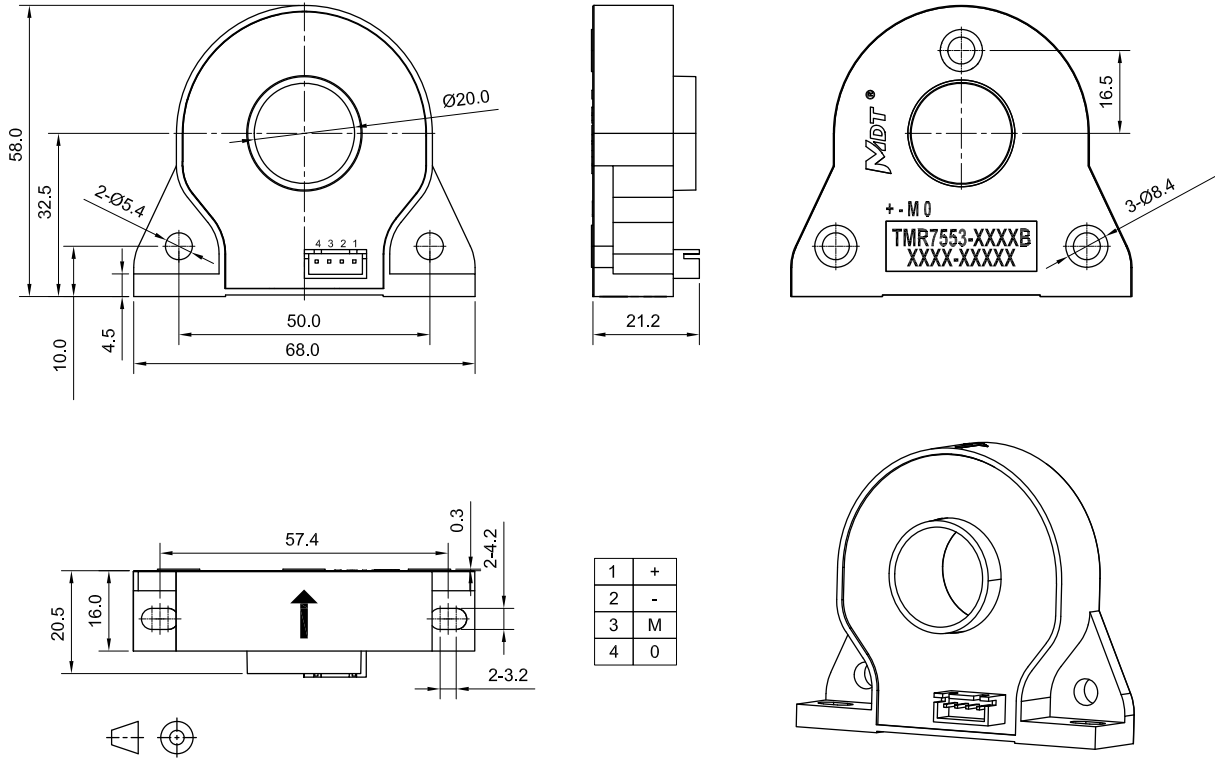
Dimension (unit: mm, tolerances for unmarked scales  $\pm 1$  mm)
